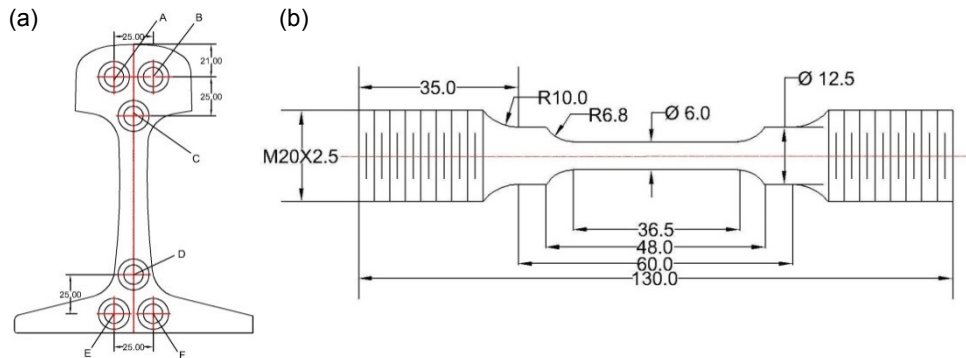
Sampling location for tensile specimens on the rail cross section (a) and dimensions and geometry of the uniaxial tensile specimens (b)
